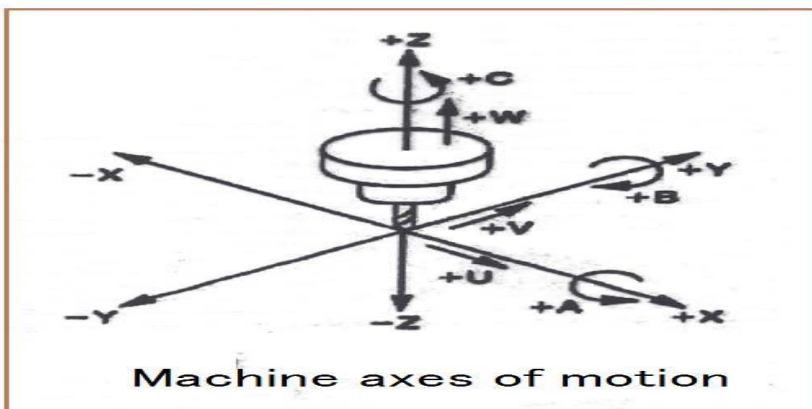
Machine axis for a three-axis vertical CNC machine (machine axis defined as spindle movement).
